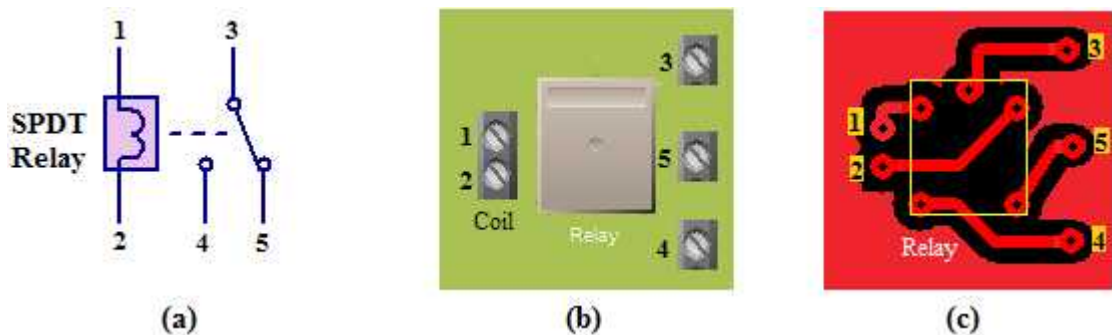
SPDT relay. (a) Schematic symbol, (b) SPDT relay on PCB top view, (c) SPDT relay on PCB solder side.
